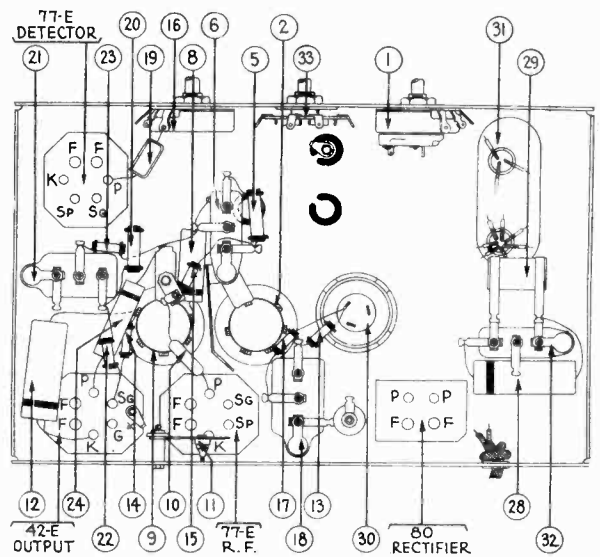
Bottom View of Chassis Showing Parts, and Location of Tube Sockets for Voltage Tests
